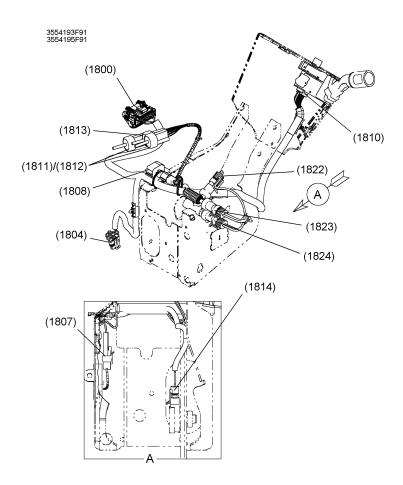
Air Park Brake Switch Location (Steering Column Support View)
